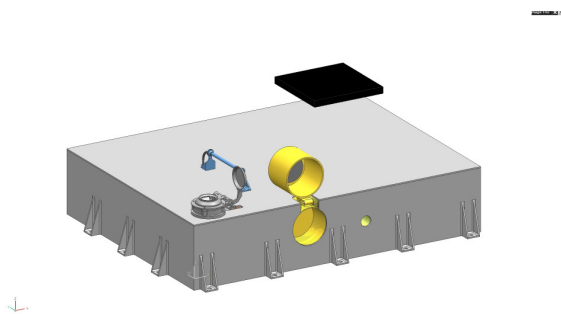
L-VRAP CAD model showing enclosure. Enclosure dimensions 460 mm × 350 mm, ht 97 mm
